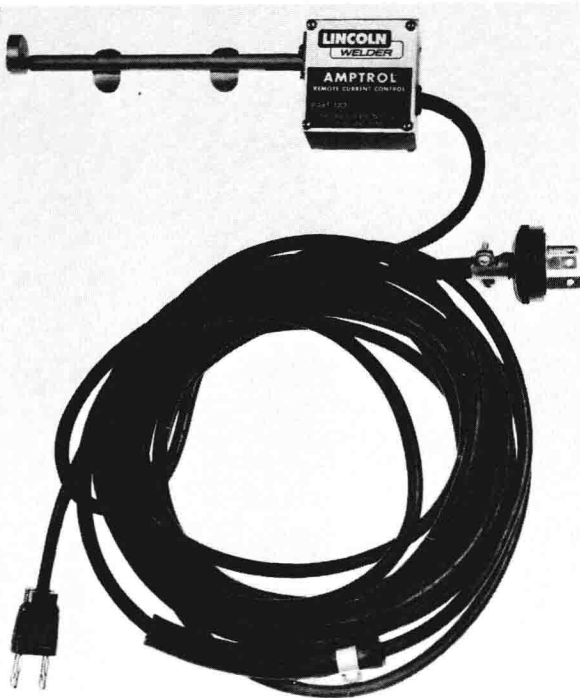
The welder controls amperage by turning the shaft with a fingertip during welding. The assembly is mounted directly on the GTAW torch. (Lincoln Electric Co.)
